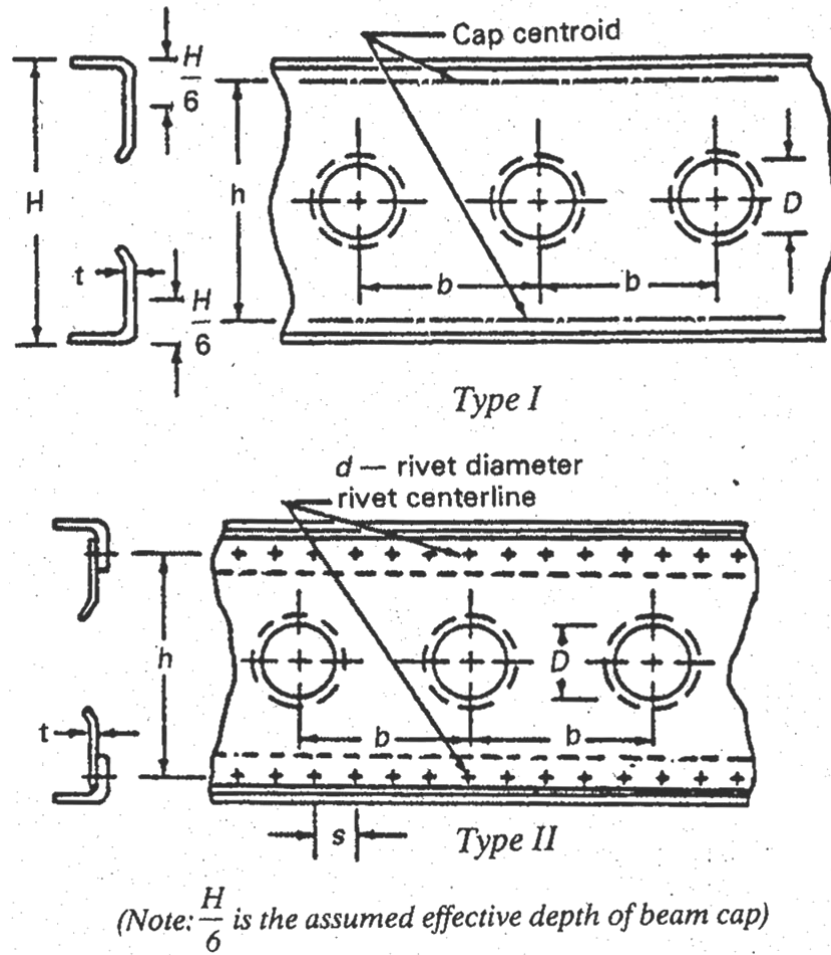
Lightly loaded rib with standard flanged lightening holes [12]
